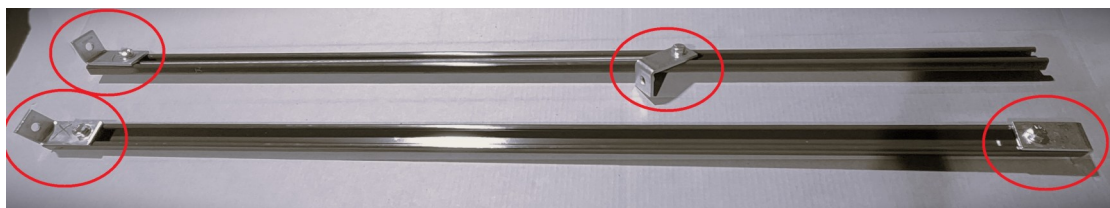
Finished assembly of rod end should resemble picture shown (without ceiling tile in place)
